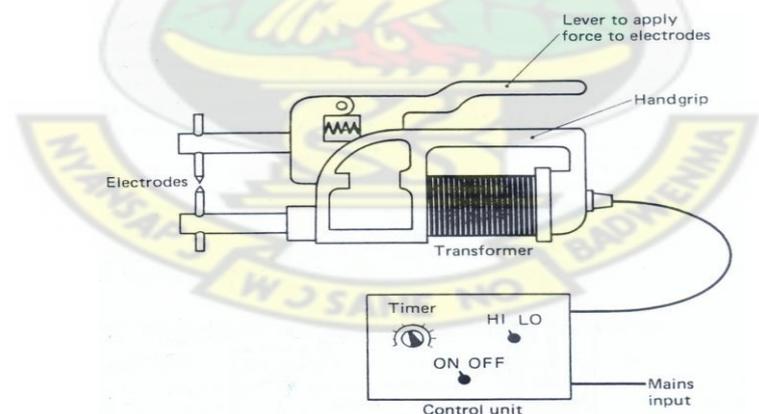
(c) small portable spot welding gun with integral transformer (Gourd L. M. 1995)
